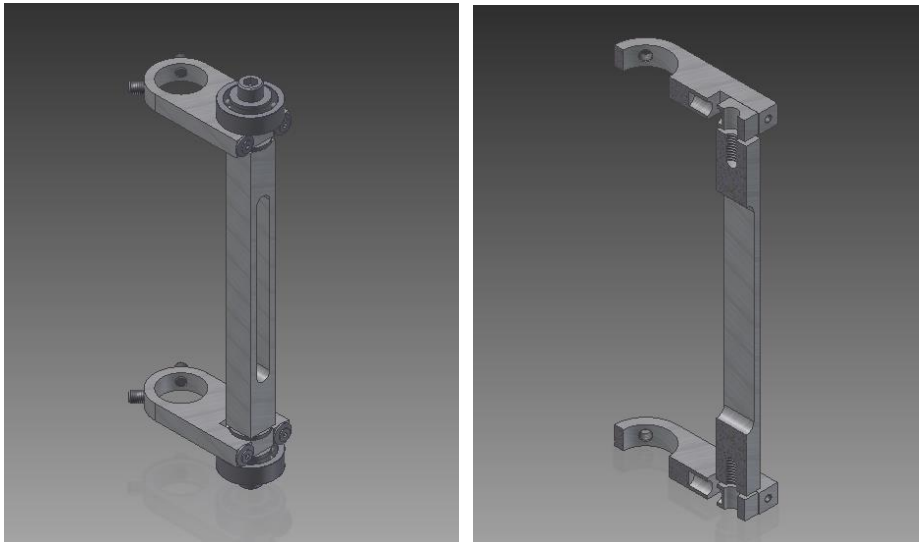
Sensor holder, forks roller bearings and fasteners (a) & X-section without fasteners (b)
